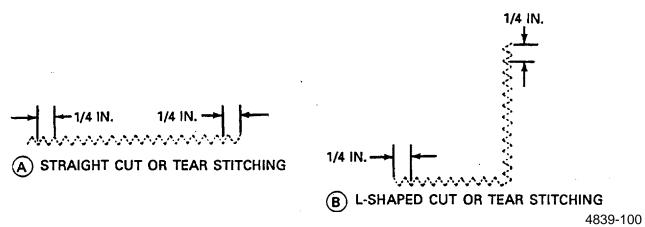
Repair Method Using a Zig-Zag Sewing Machine.
